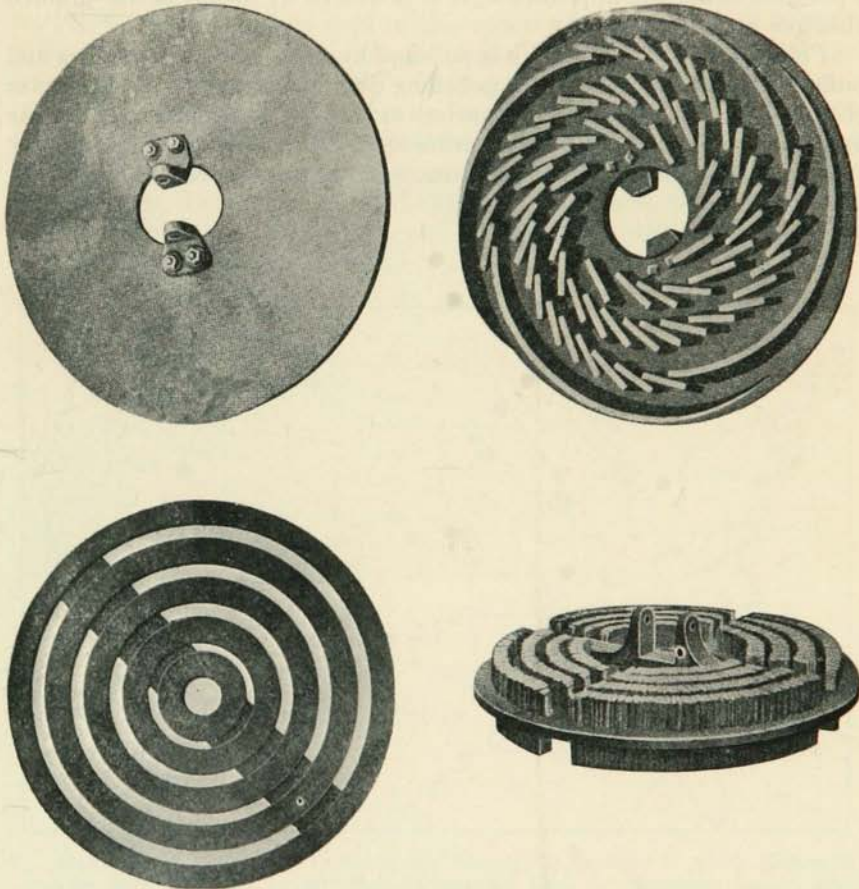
Polishing wheels for machines such as that shown in Figure 34. *Top left:* Iron disk for use with sand or shot as an abrasive. *Top right:* Scroll wheel. *Lower left:* Emery rings. *Lower right:* Felt buffer.
